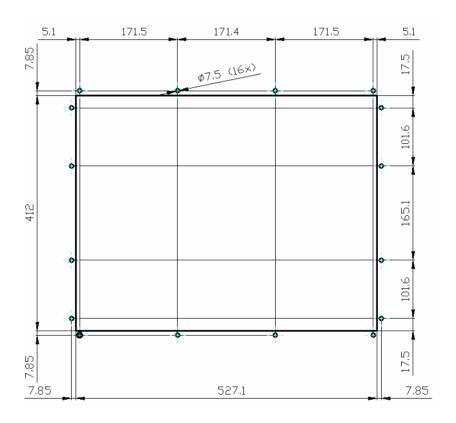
Hole pattern for KFM21_e mounting (all value in mm)
